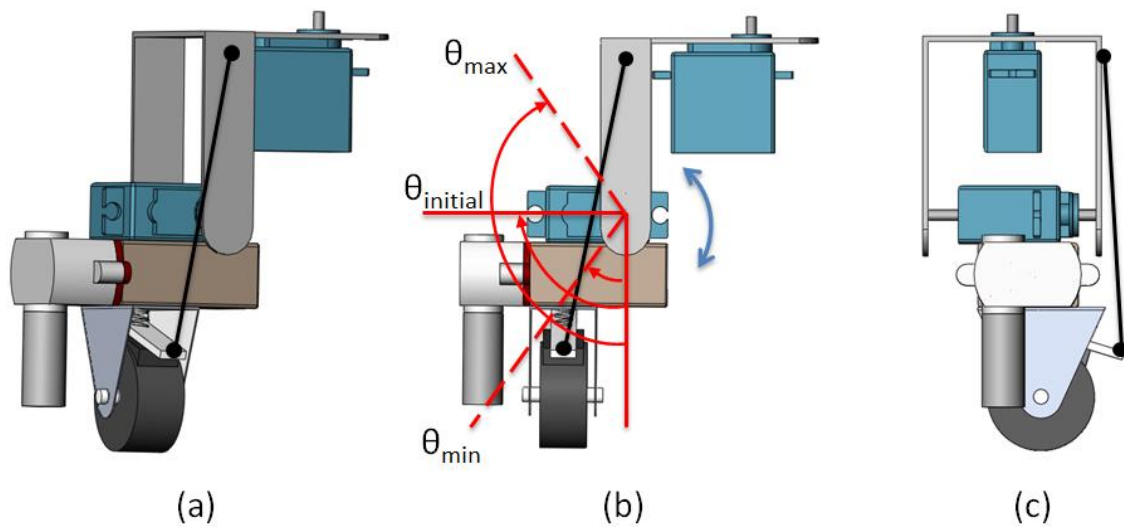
10 Leg-wheel hybrid actuation system: (a) overall structure, (b) front view and (c) side view
